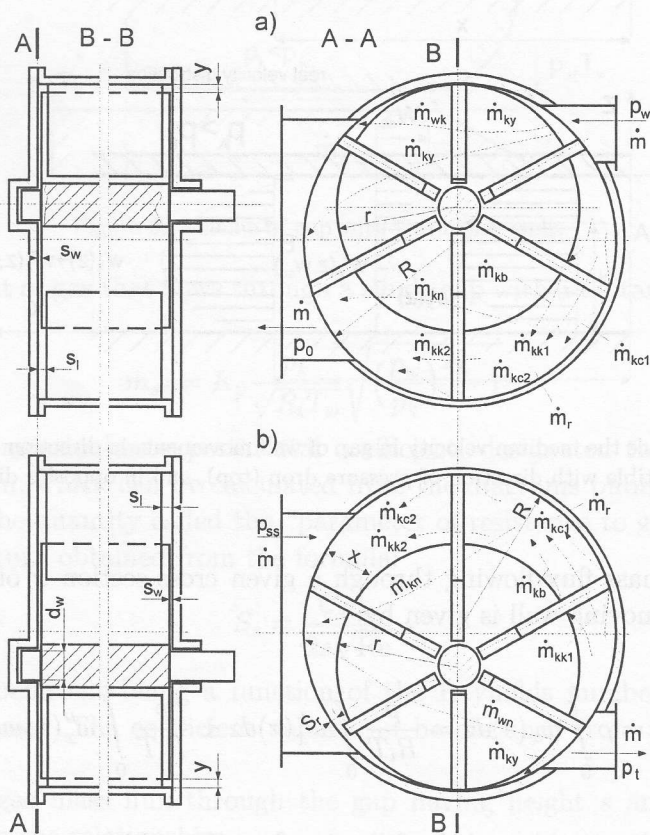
Gap types and leakage paths of gas in multi-vane machines; a) expansion machines, b) compression machines.
